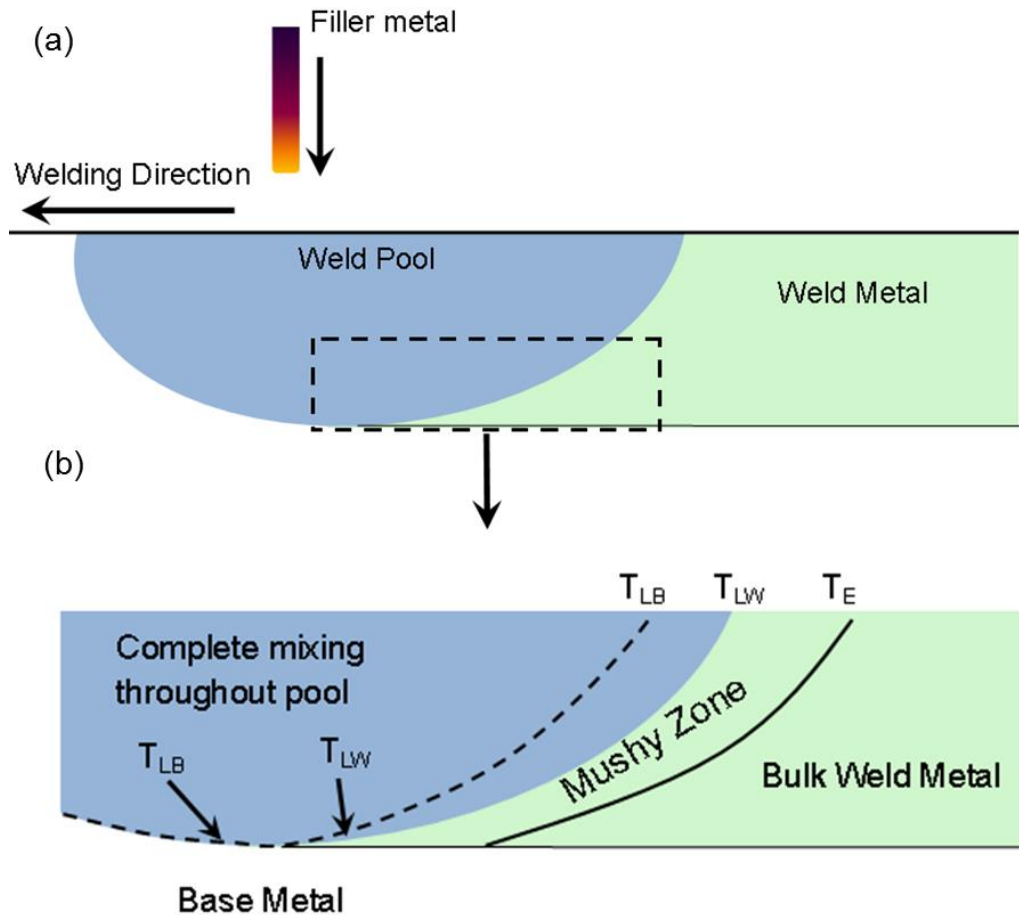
Complete mixing throughout the weld pool with a dissimilar filler metal that makes $T_{LW} < T_{LB}$. a) weld pool and b) bottom of weld pool. Both images illustrate a vertical longitudinal cross-section. Adapted from [43].
